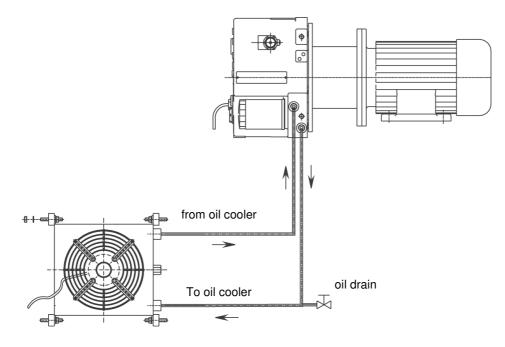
Block cooler, models with external air-cooled oil cooler
